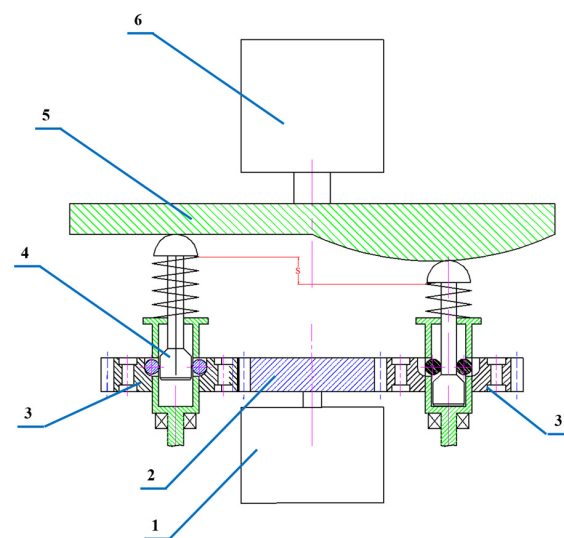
Schematic view of the filament shifting mechanism; 1—Stepper motor; 2—Sun spur gear; 3—Planet spur gear; 4—Pushing rod; 5—Cam disk; 6—Stepper motor.
